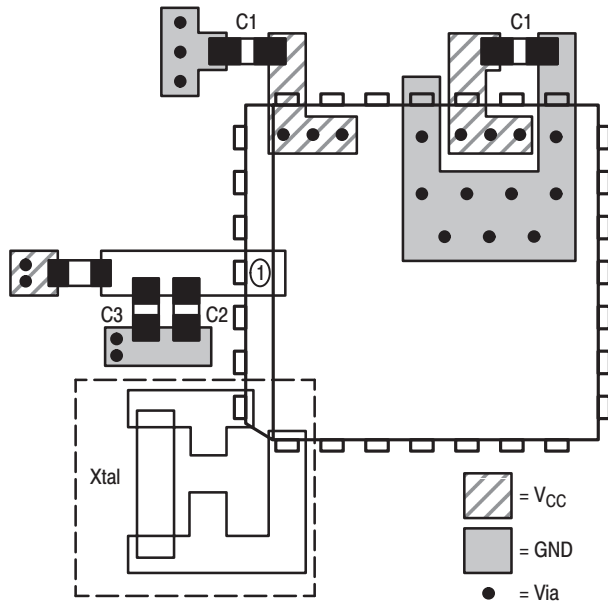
PCB Board Layout Recommendation for the PLCC28 Package
